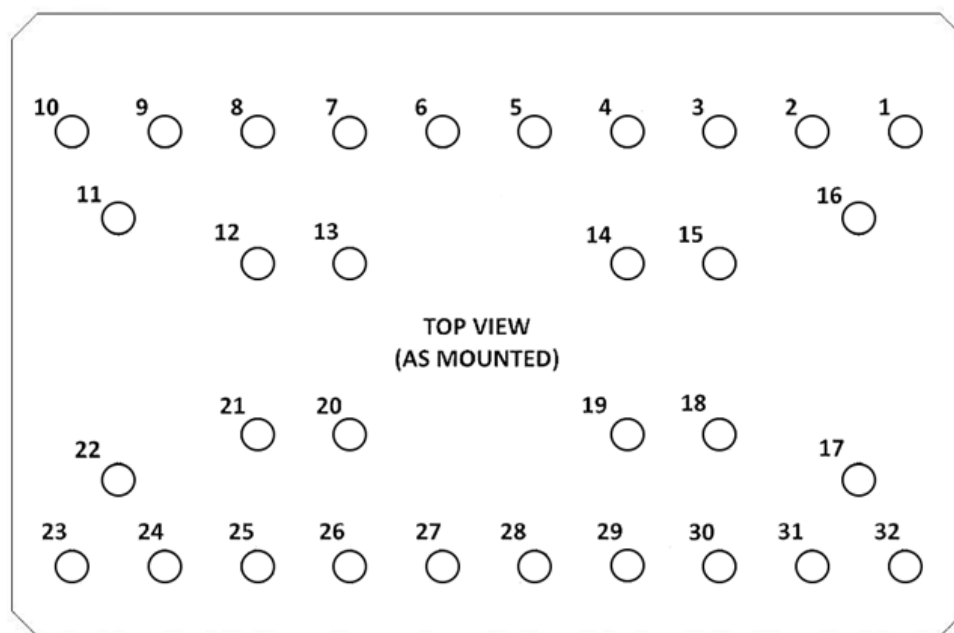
MM101 2.37 mm x 1.58 mm Flip-Chip Package Pinout (Top View/As Mounted)
